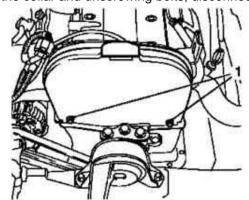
Bolts for fastening the top of the lid toothed belt: 1 - bolts fastening
